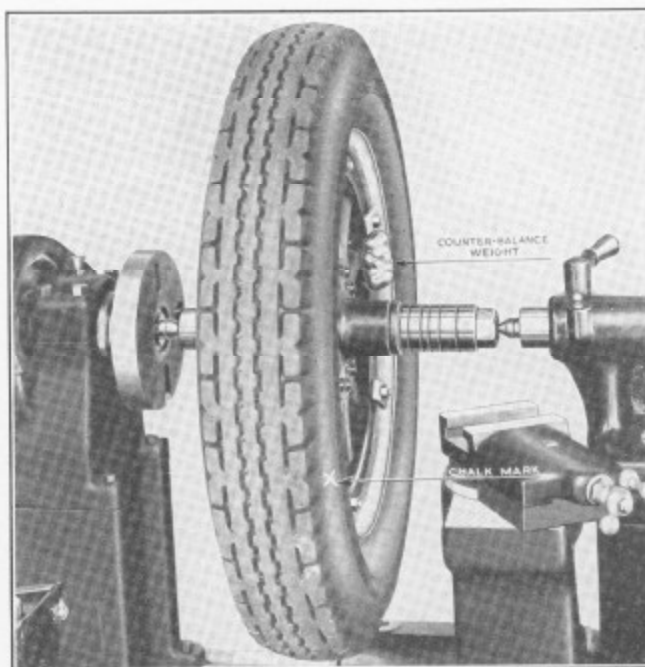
Balancing an Automobile Wheel in the Brake Drum Lathe
